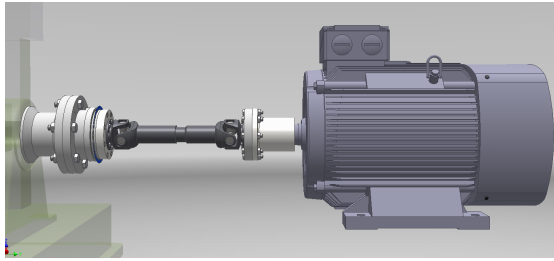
3D CAD drawing of the electric motor and drivetrain.
